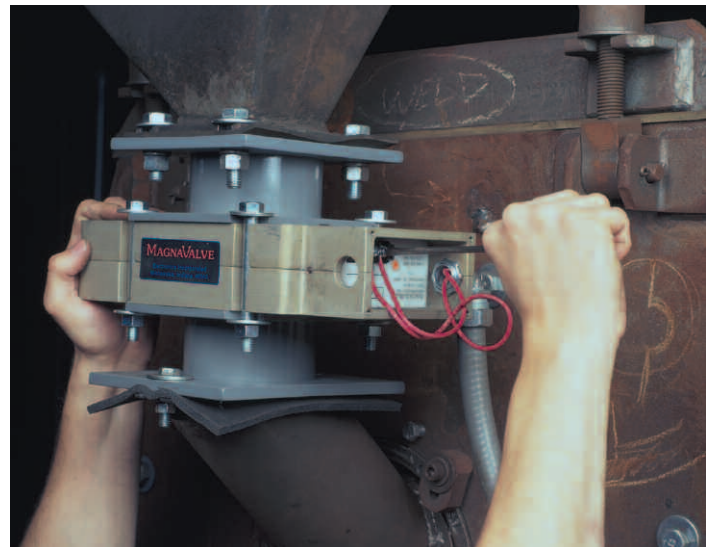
Attaching two wires from Model AC MagnaValve Controller
